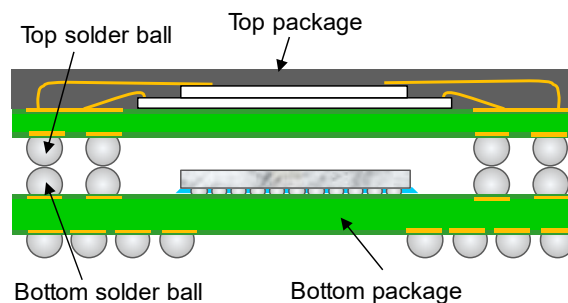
Cross-sectional view of a PoP using the BoB approach just prior to reflow
